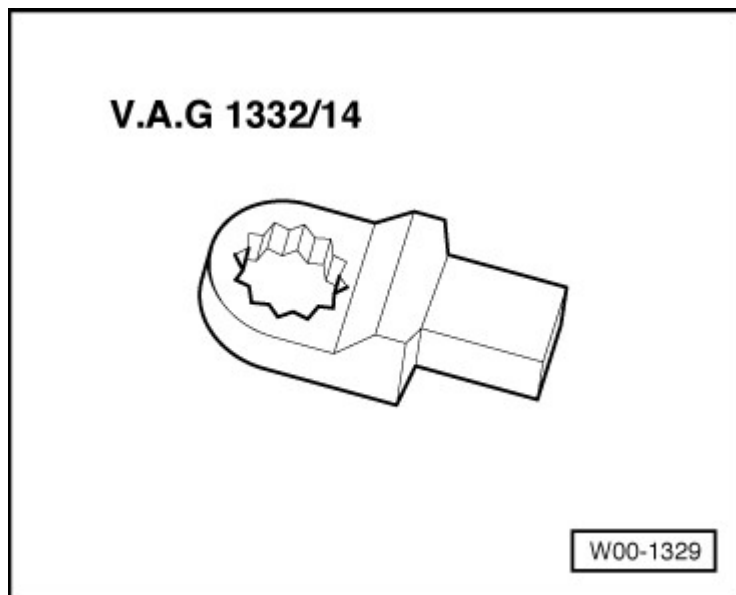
Identifying Ring Spanner Insert AF 16 V.A.G 1332/14
